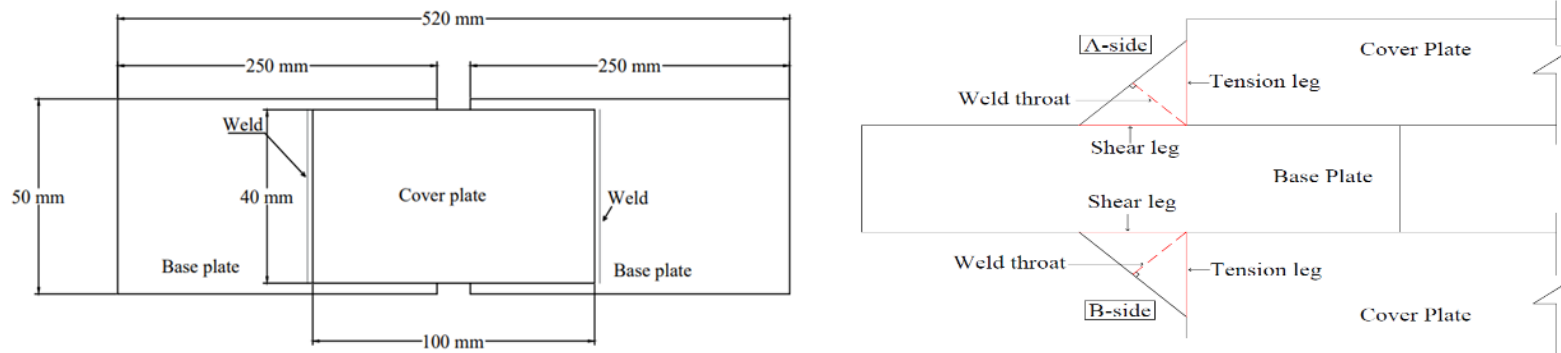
Plan view (Left) and weld profile measurement before testing (Right) of the transverse fillet lap-welded connection.
